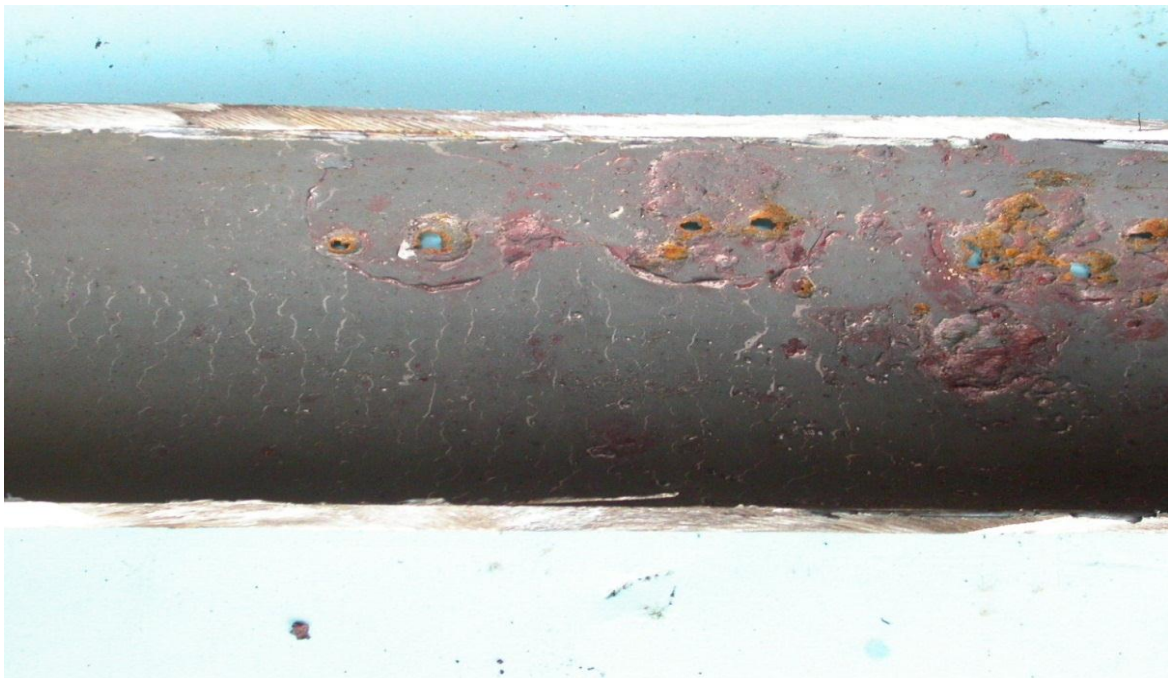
Primary reheater tube subjected to pitting corrosion [47]
